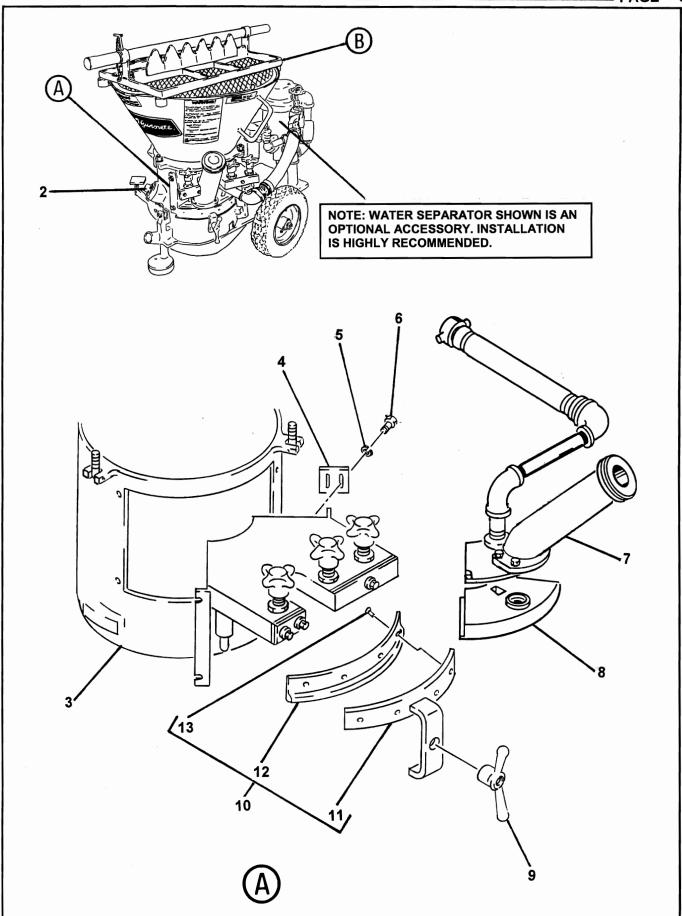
1.5 INCH LINER TYPE PAD BACKUP ASSEMBLY
